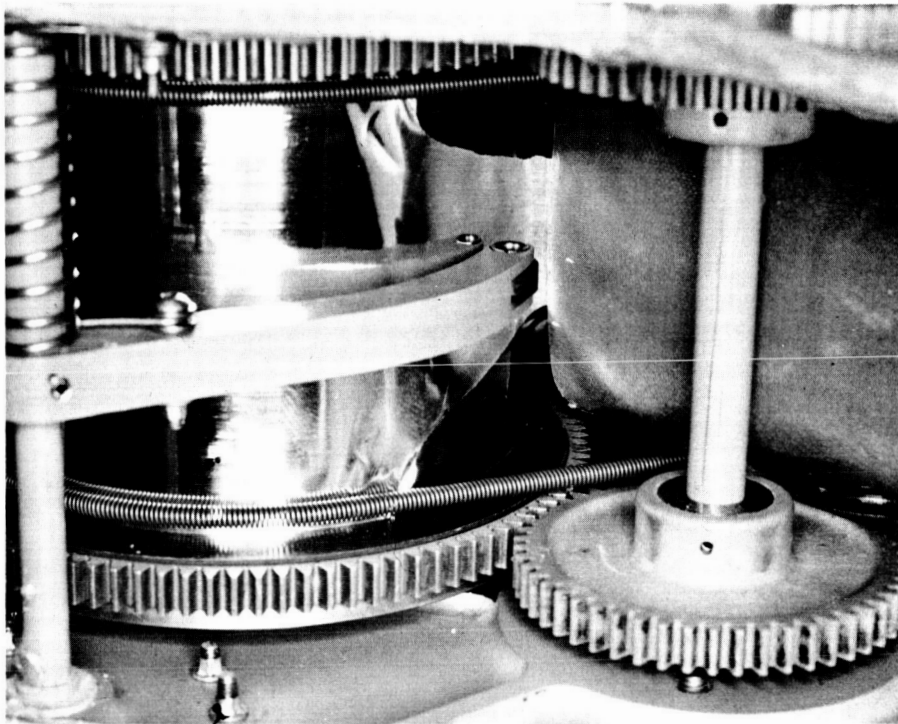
Erection Unit 2 Boom Element Failure,
